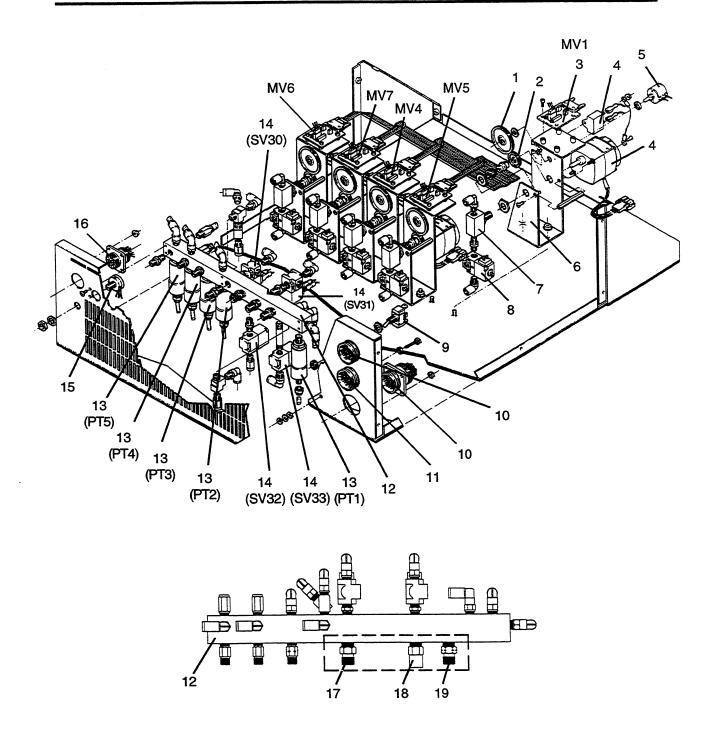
Manifold SA, Motor-Valve SA & Rear
